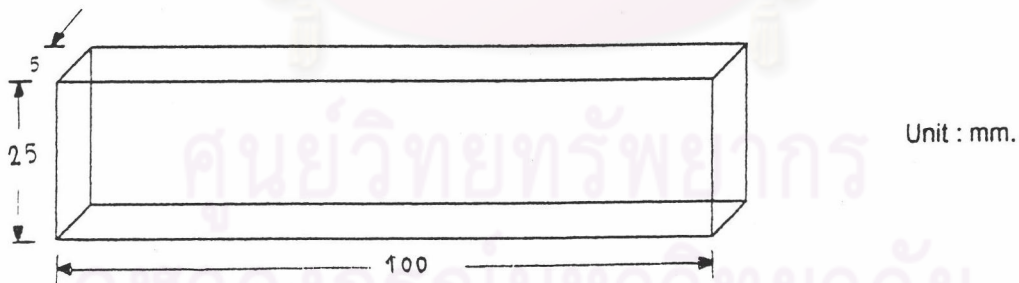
Dimension of flexure stress and MOE testing specimen.
